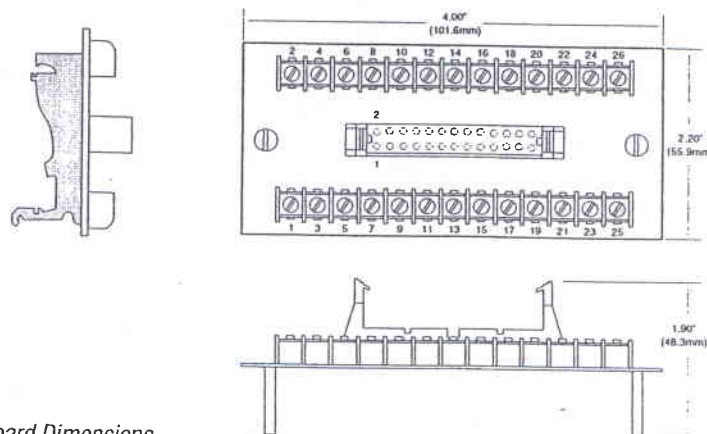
OM7-IF Universal Interface Board Dimensions.
